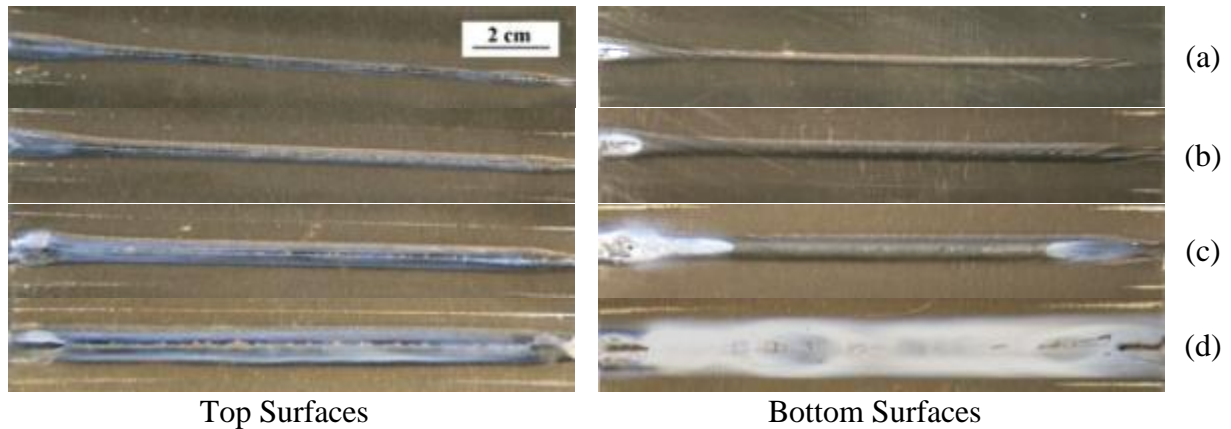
Top and bottom weld bead surfaces of bead-on-plate welds made using 4 kW at: (a) 4.0 m/min, (b) 3.0 m/min, (c) 2.0 m/min, and (d) 1.0 m/min.
